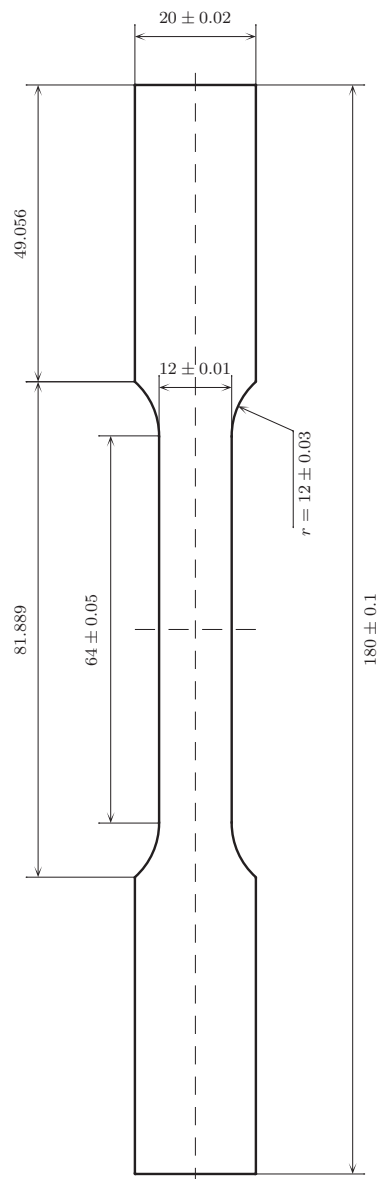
Smooth tensile specimen ST₁₂ (dimension in mm).
